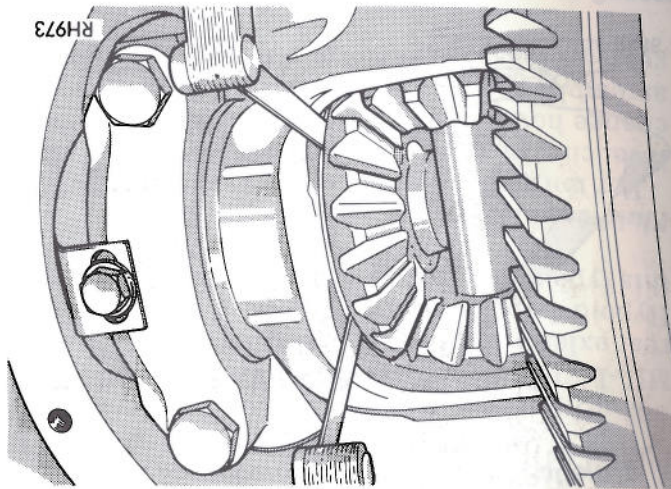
Insert a Matched Pair of Thickness Gauges to Determine Clearance
